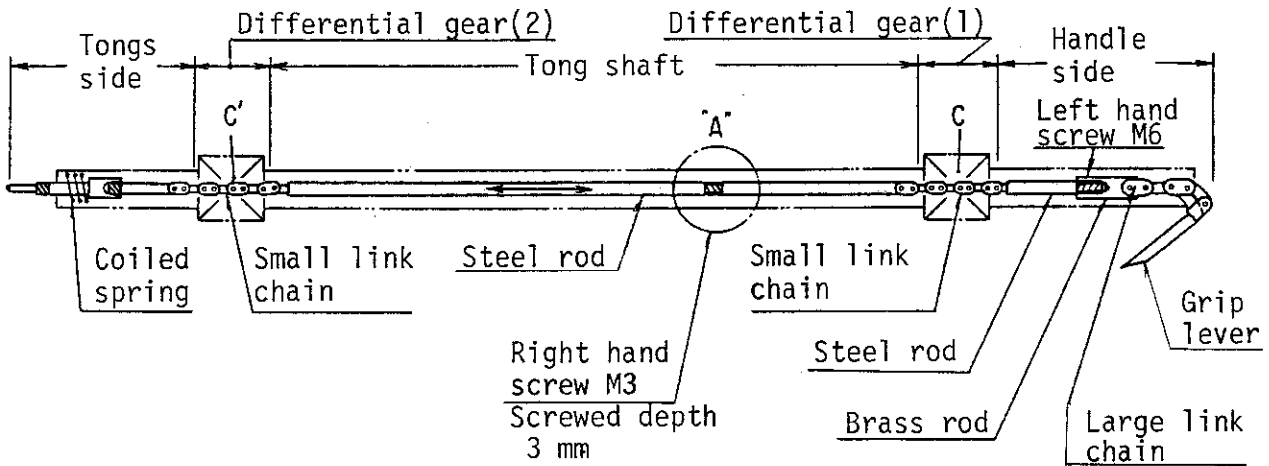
Handle grip mechanism of the type A 15 ball-socket tong manipulator
